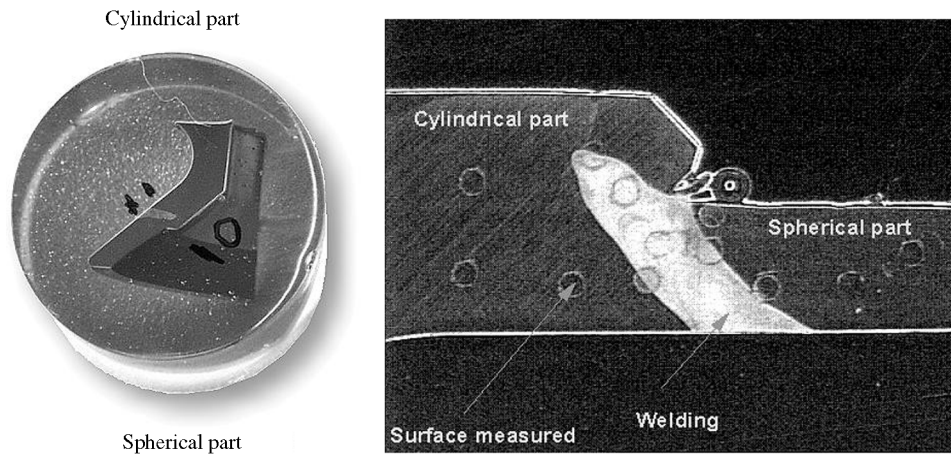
Topography of the measurement zones in sample #1; stainless steel stem zone; stainless steel sphere zone; welding zone.
